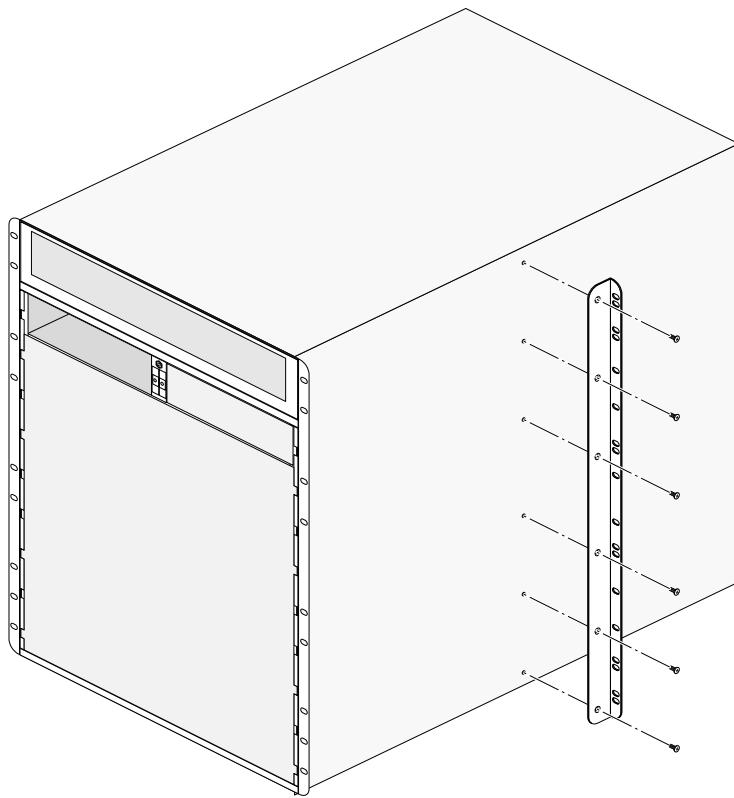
Attaching Mid-mount Brackets (position "C" shown)
